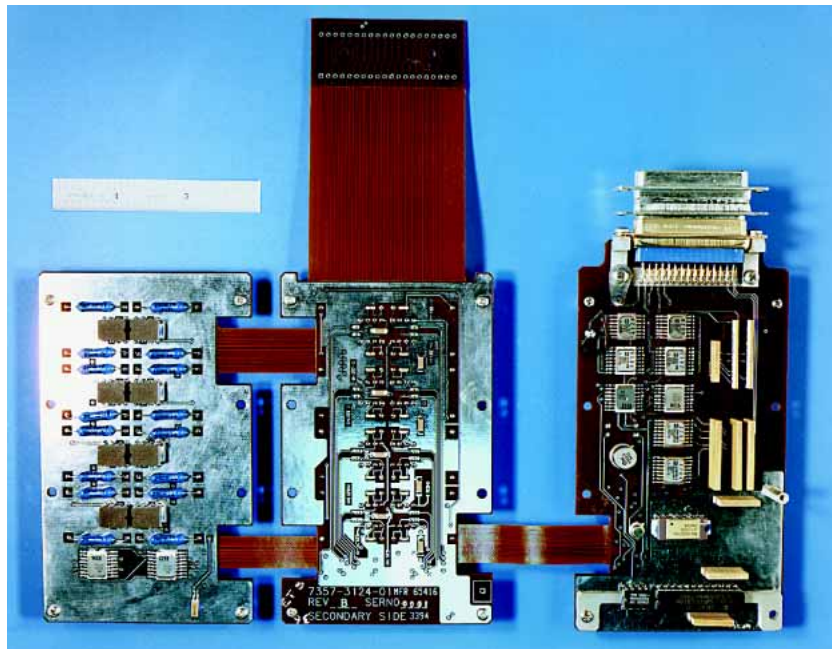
Rigid-flex printed wiring board in a flat configuration.
